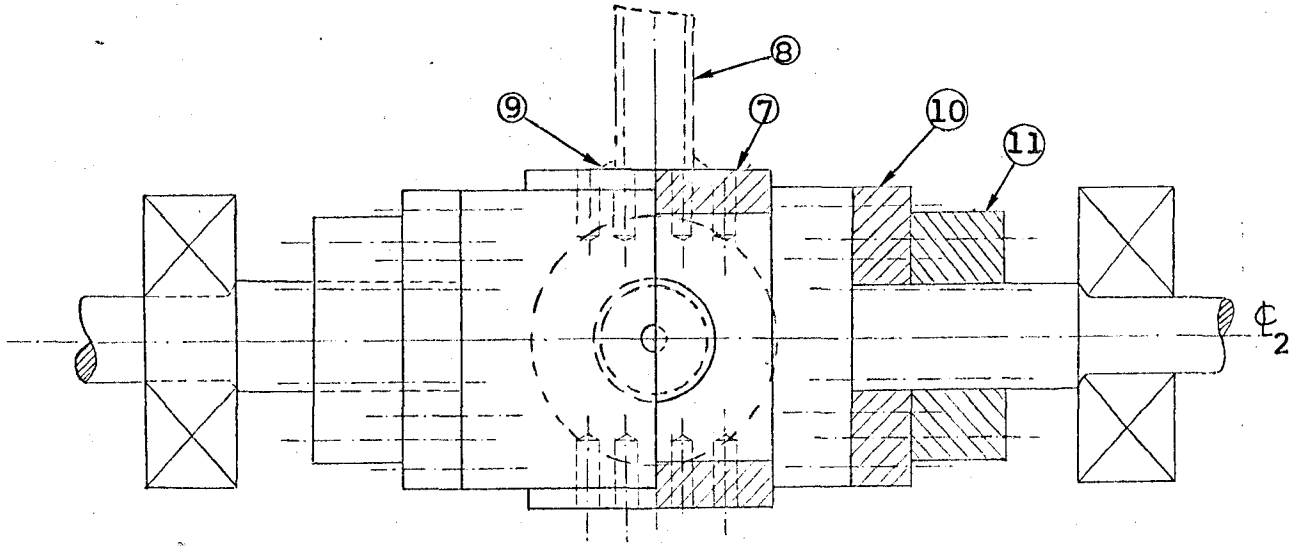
(a) * Sectional Elevation of the End Fixture
